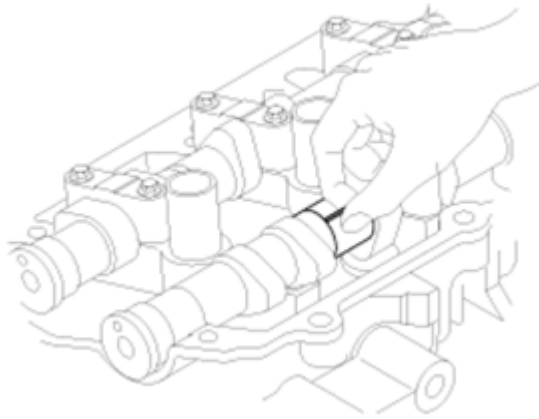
Inspecting Camshaft Journal Clearance
